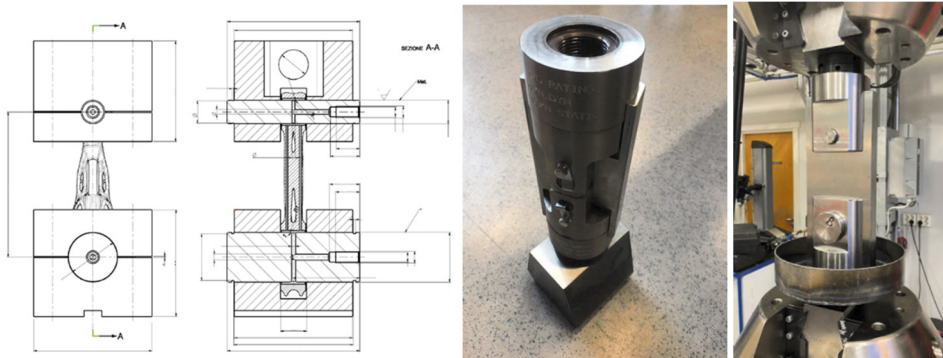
Load scheme for fatigue test and fixtures for mounting and alignment
